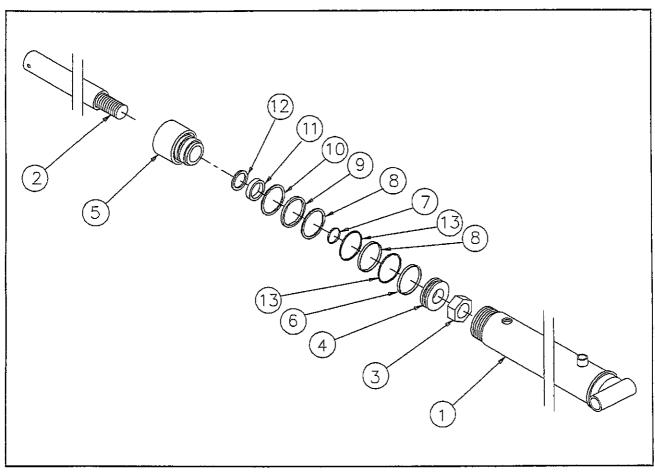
Gooseneck Trailer Tilt Cylinder Assembly
